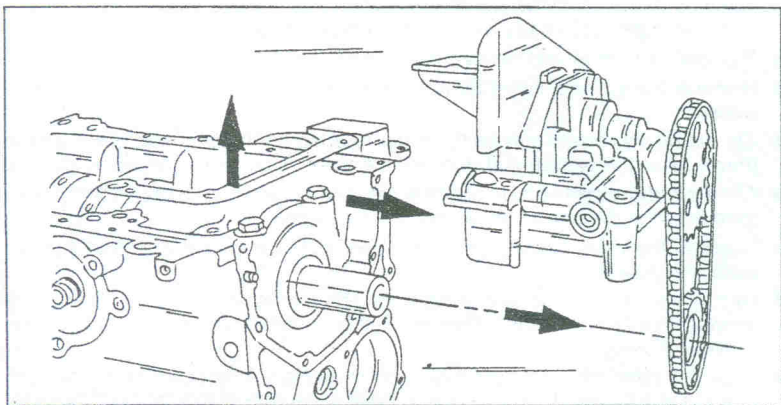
Removal of the oil pump together with the sprocket.
